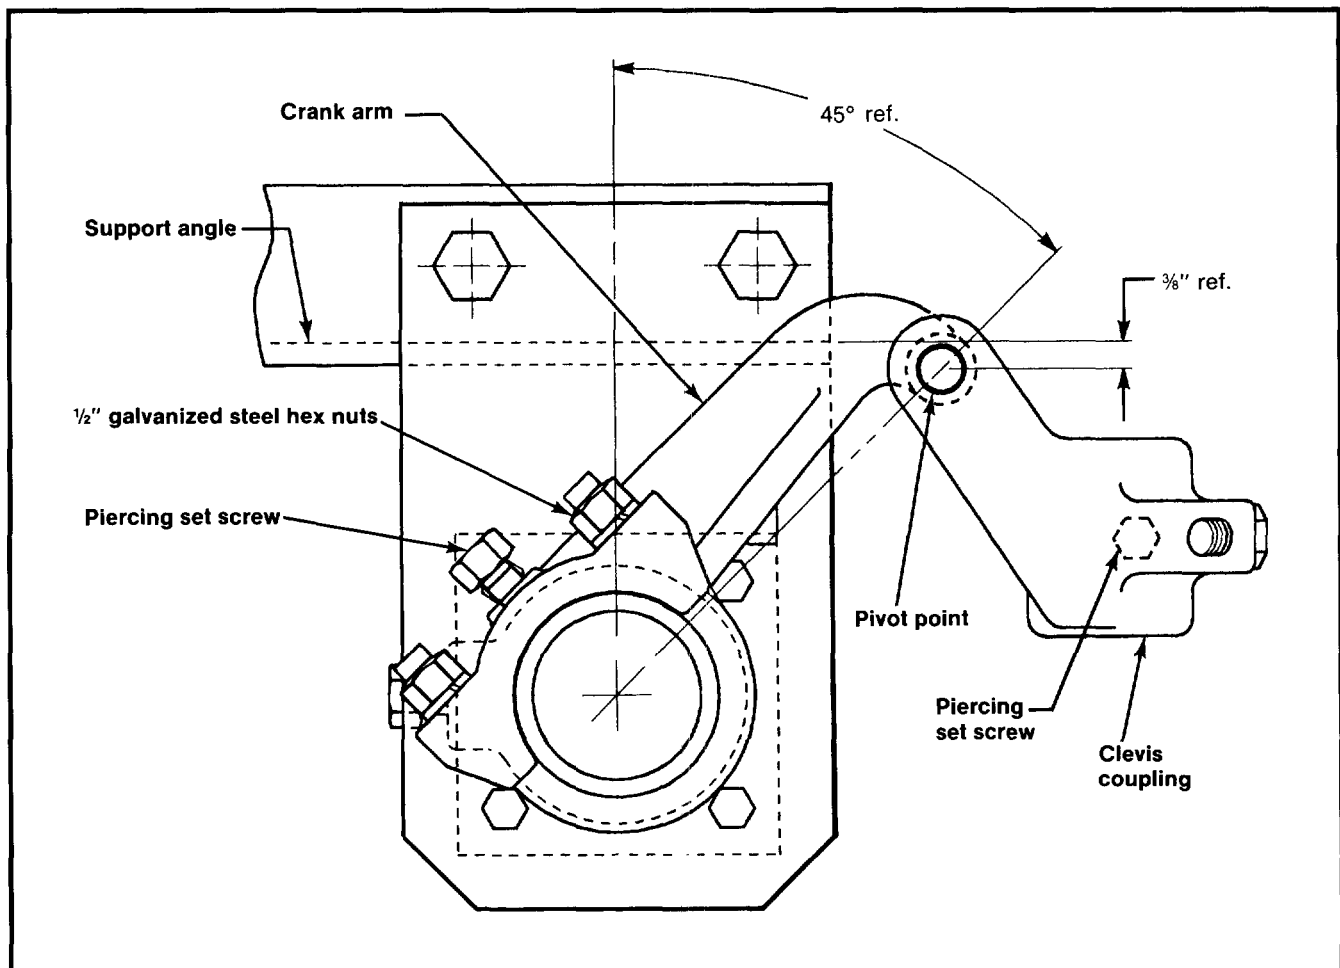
Drive lever assembly, shown in grounding-switch-closed position.
